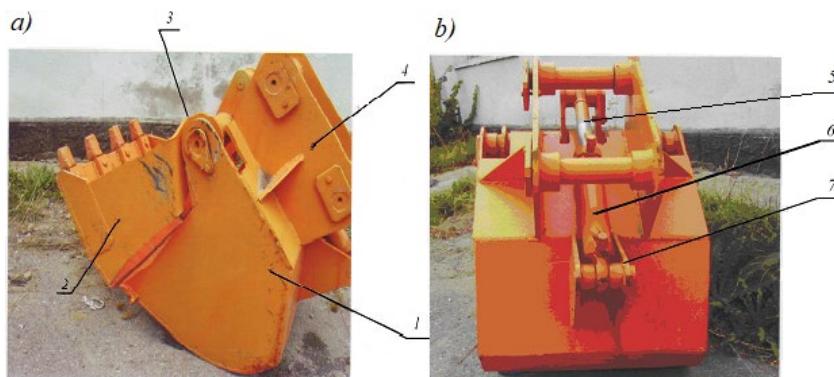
Excavator bucket design for development of coarse clastic soils of mudflows: a) - is a side view; b) rear view, 1- main bucket; 2 shows the opening part of the bucket; 3 - hinge; 4 - bracket for attachment of hydraulic cylinder; 5 - hydraulic cylinder rod; 6 - hydraulic cylinder; 7 - bracket
